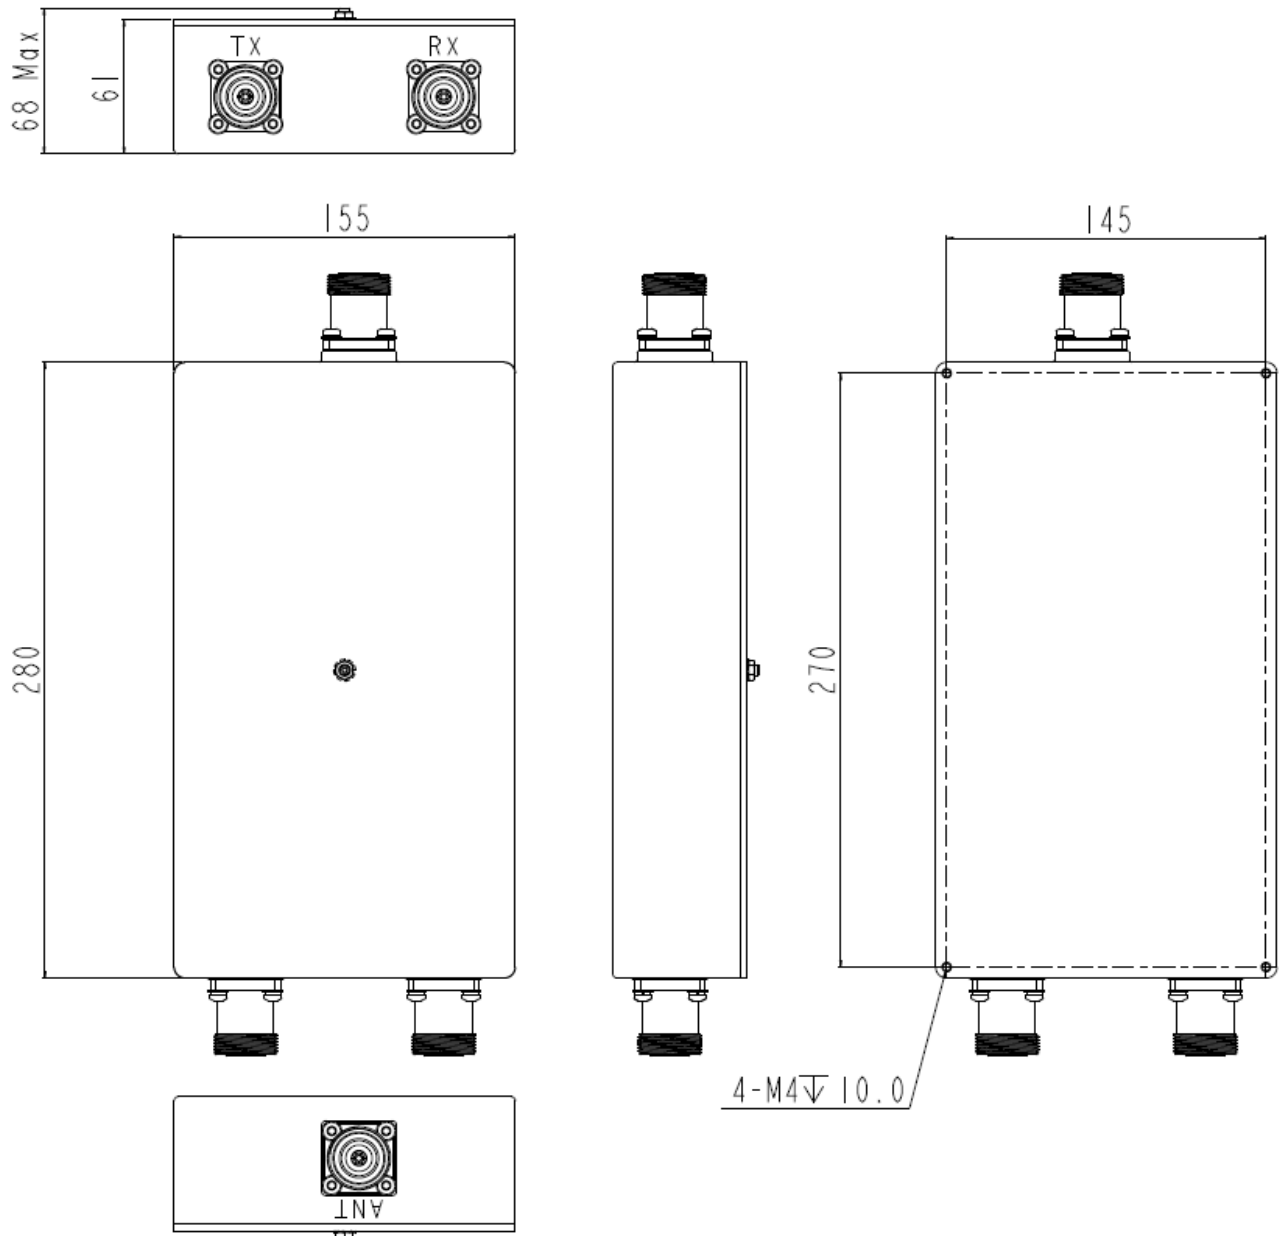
JX-CD2-415M430M-65D3 front panel layout
